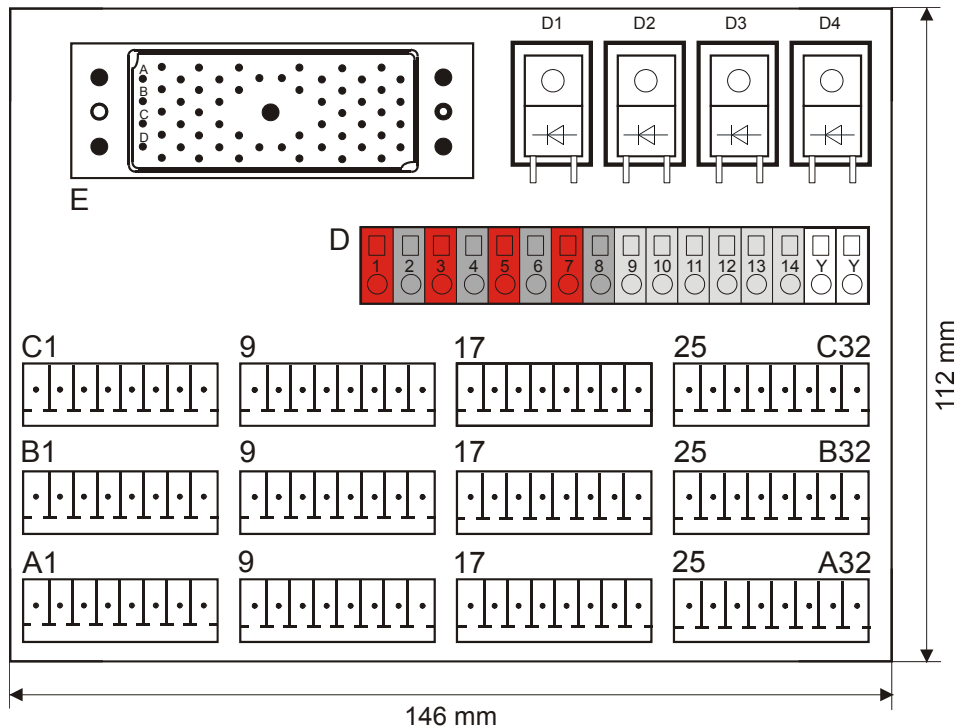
Mechanical design and dimensions of Terminal Module H 7015A
